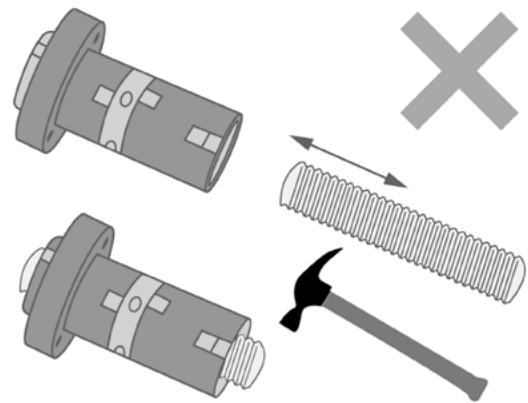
Errors in the assembly of Ball Screw nuts
